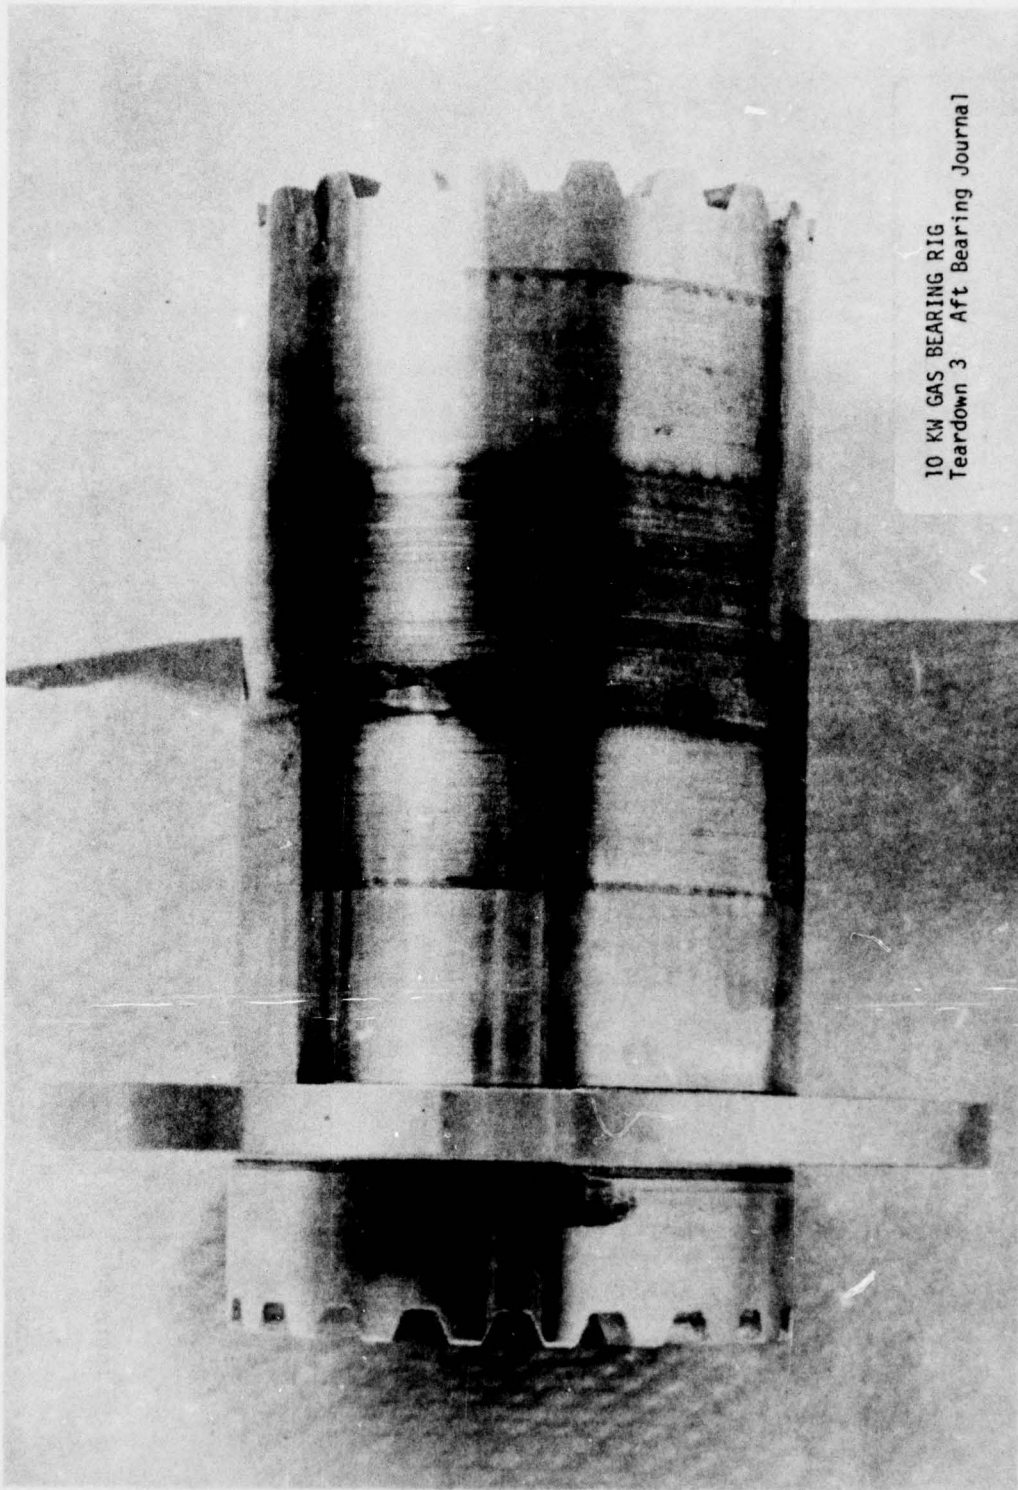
10 KW Gas Bearing Rig - Teardown 3, Aft Bearing Journal
